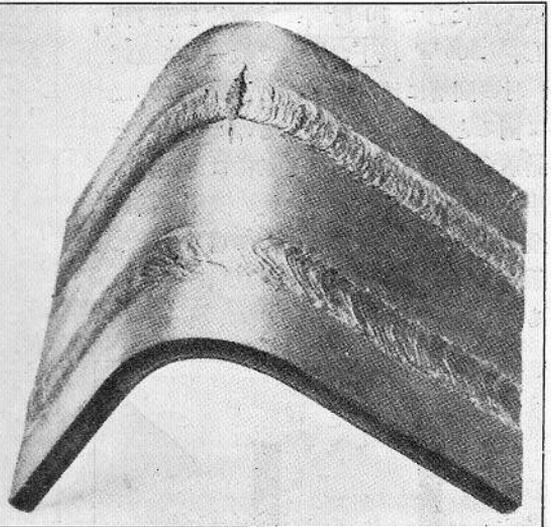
Welds similar to those in Fig. 2 were given a Bend Test with the Result that the Coated Rod Weld shows Superior Characteristics of Ductility. The Bare Rod Weld shows the Fracture.
